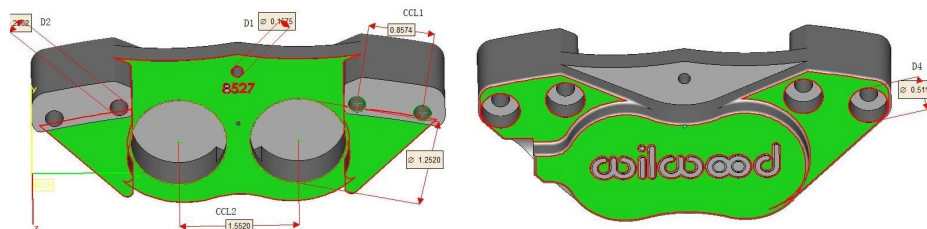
Six Key Dimensions for Brake Caliper Quality Control.
